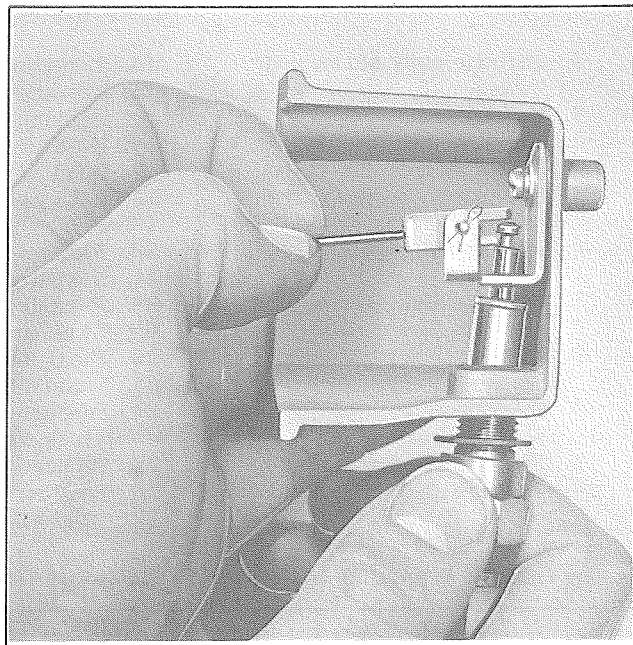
F-9F. Engaging Model DC Float Lever in Valve Stem Groove
